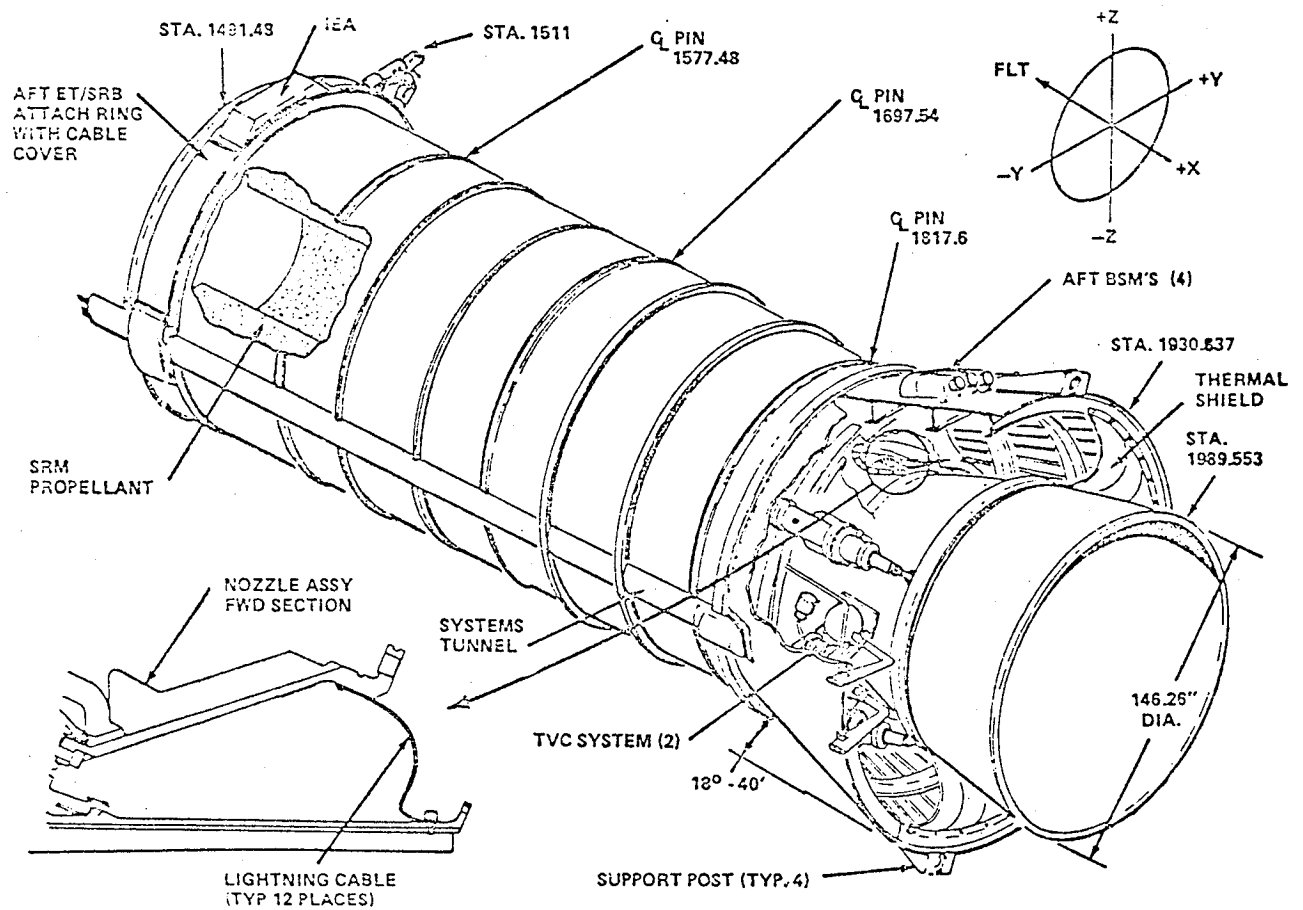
Space Shuttle Aft Skirt Assembly
